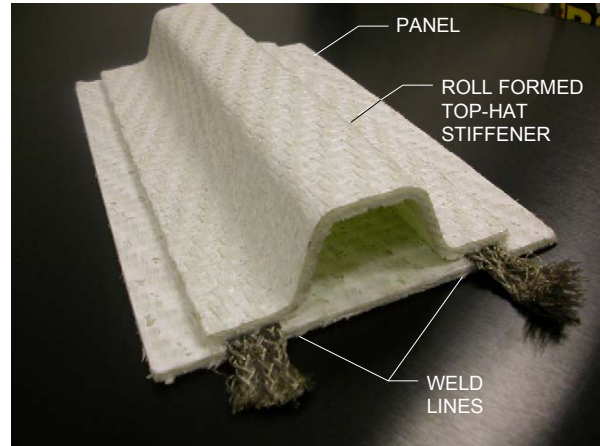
Fusion welding of a stiffener to a panel.
